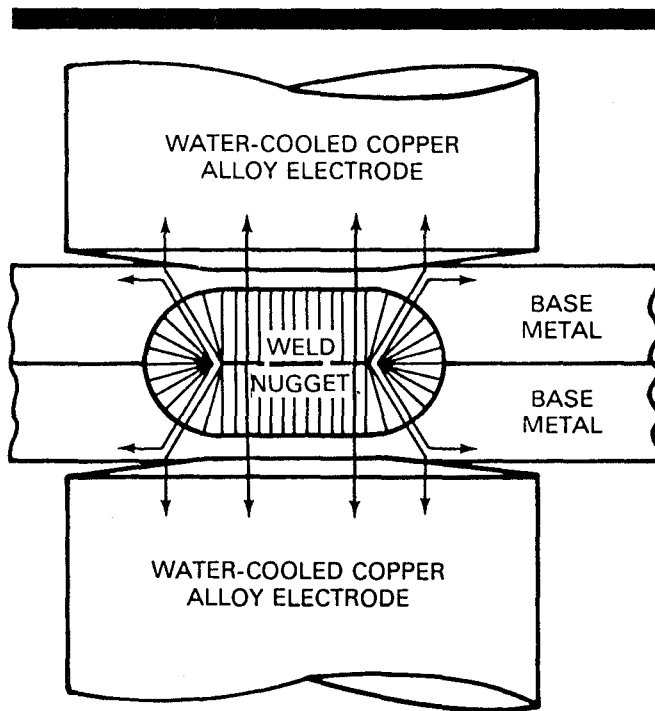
Heat Dissipation During Resistance Welding into the Surrounding Base Metal and Electrodes
